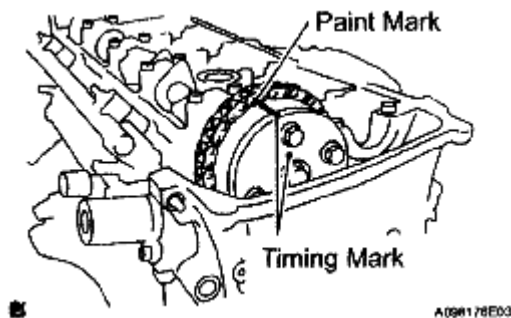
Identifying Camshaft Timing Gear Paint Mark And Timing Mark On Camshaft Timing Gear
